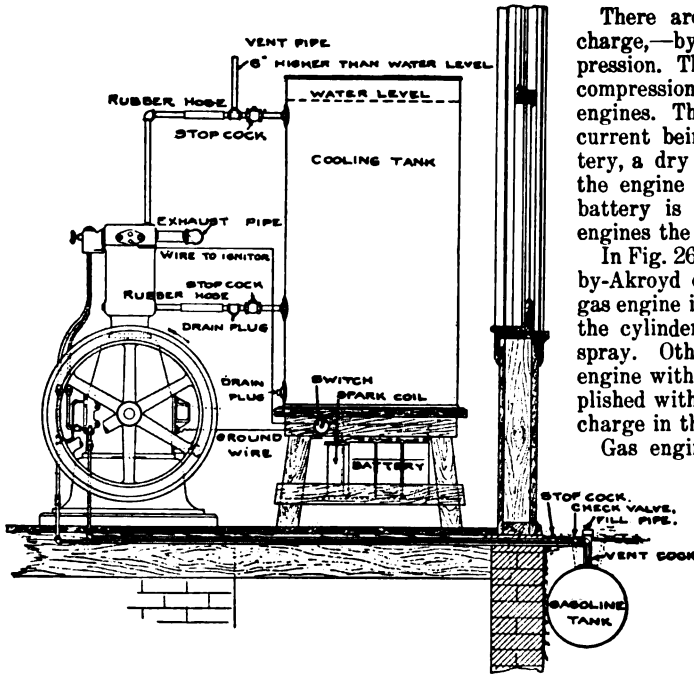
Elevation of a vertical three horse-power four-cycle gasoline engine, showing connections with cooling tank and battery.
